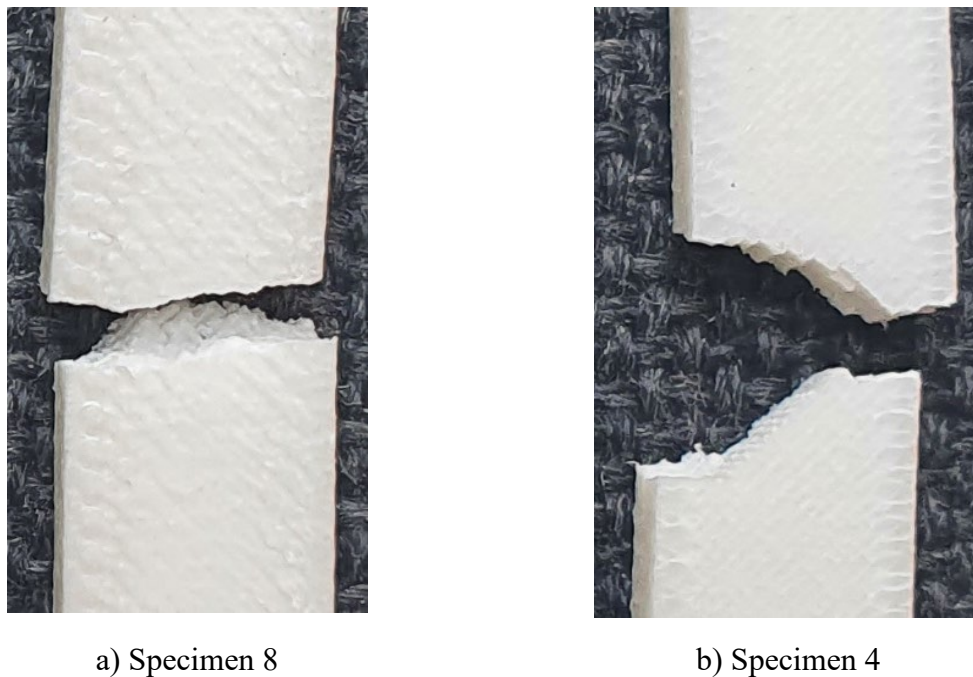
Details of the failure mode and the appearance of the fracture surface (brittle fractures)
